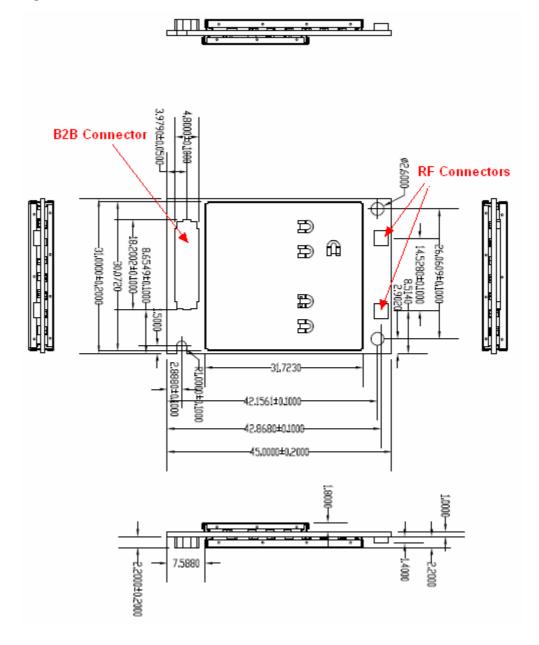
Mechanical dimensions of the MC703 CDMA EV-DO module (unit: mm)
